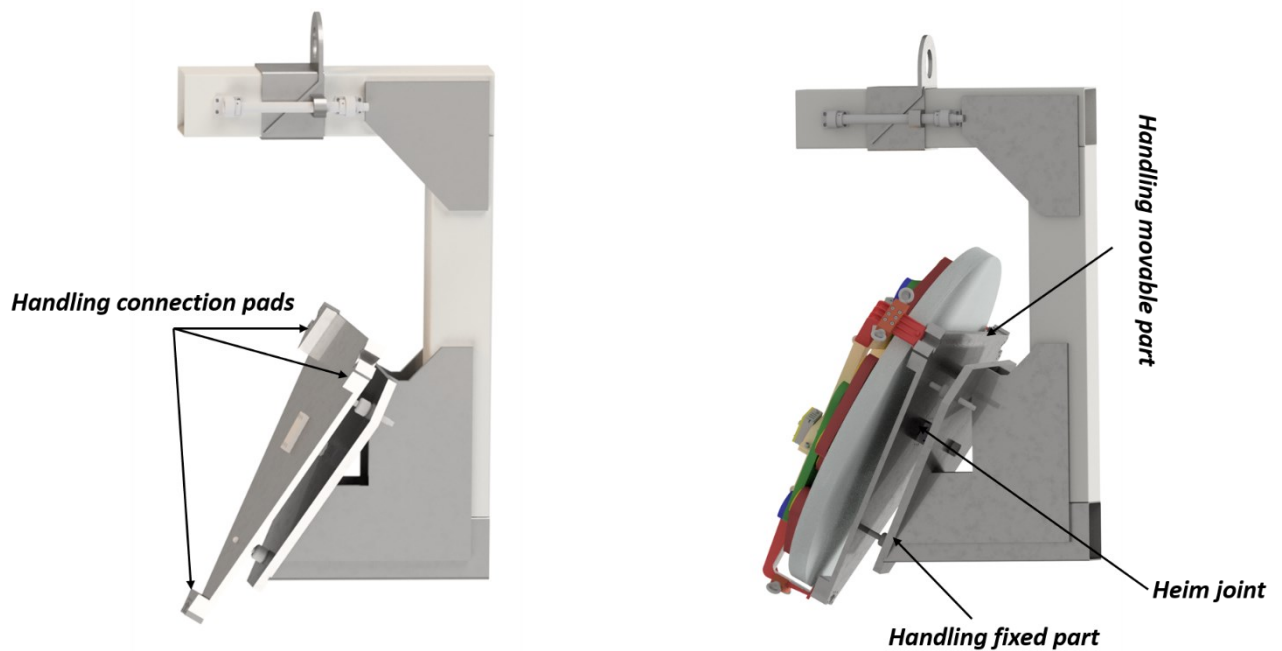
C-shaped handling for M8 installation. The interface between M8 and the handling is between the 3 branches embracing M8 and the 3 connection pads of the handling. The handling is equipped with a hook hoisting connection point having the possibility to slide, in order to have it aligned with the barycentre of the system both when M8 is connected and disconnected.
